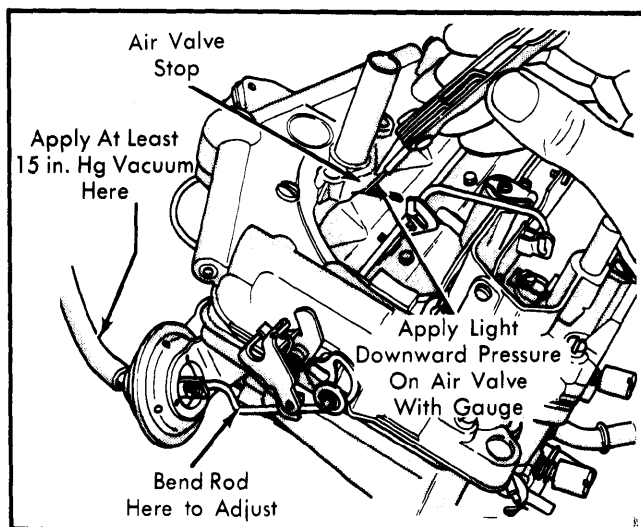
Adjusting Choke Diaphragm Connector Rod
